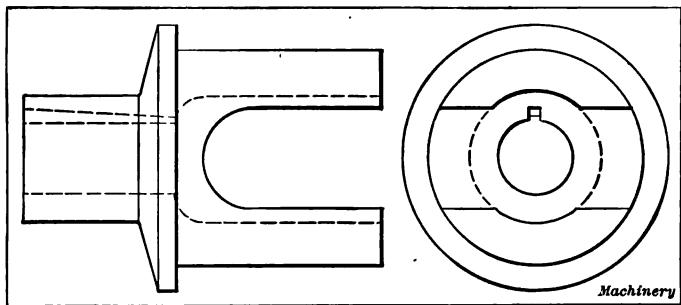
Universal Joint Yoke in which Tapered Keyway is to be Broached
